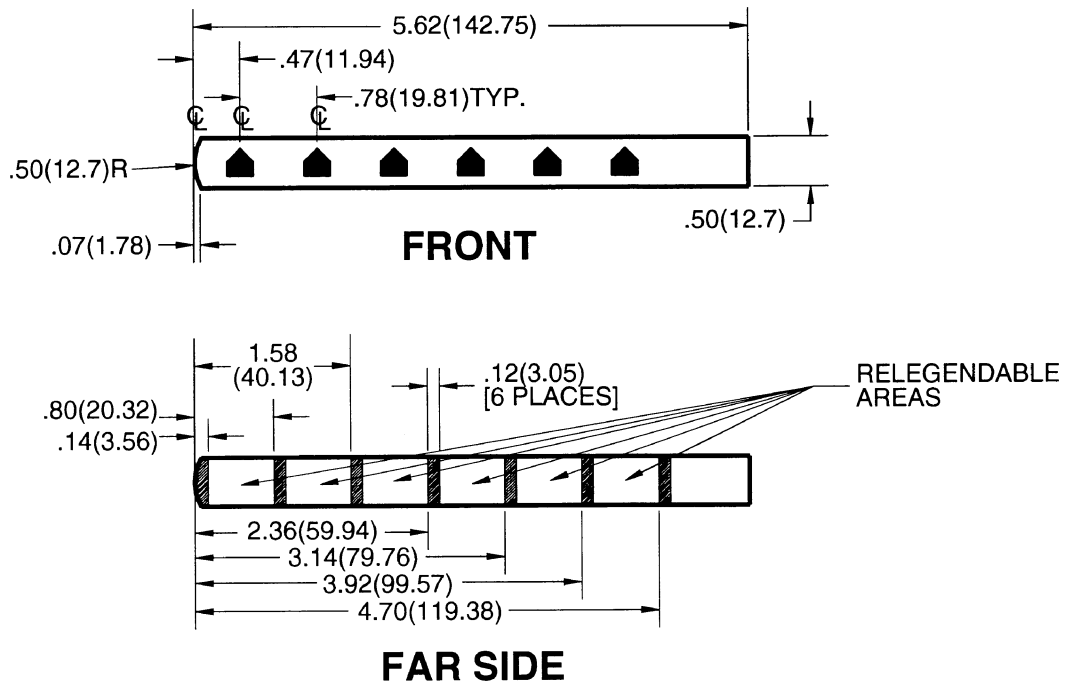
Keypad Inserts with Dimensions (F1 - F10)
